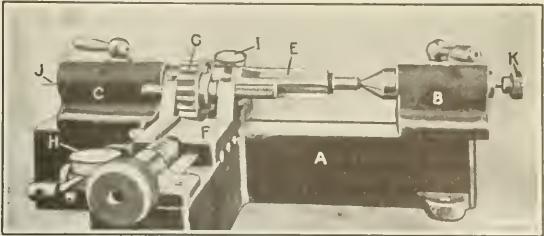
Fixture for testing Concentricity of Pinion Shaft
